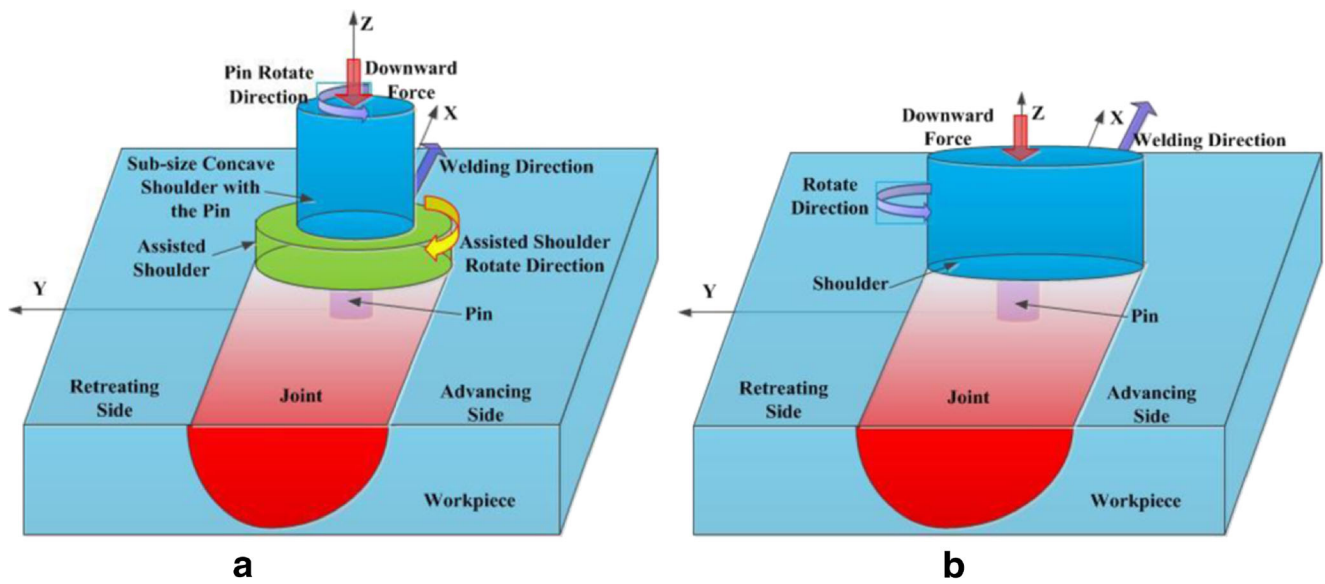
Schematic drawings of a reverse dual-rotation friction stir welding (RDR-FSW) and b conventional FSW
